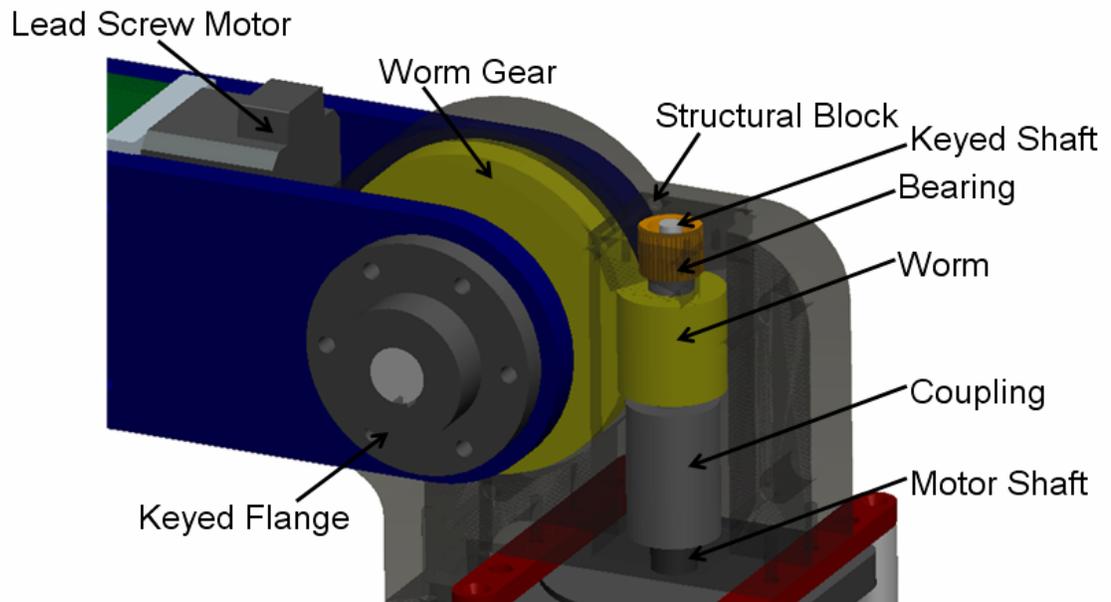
Rotational joint motor shaft: collar, worm gear, and needle bearing.
